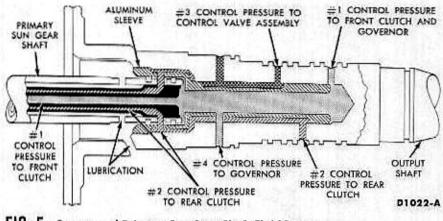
Output and Primary Sun Gear Shaft Fluid Passages
